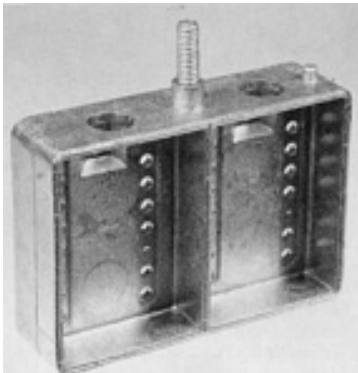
An injection-molded iron-nickel housing used in personal computers
